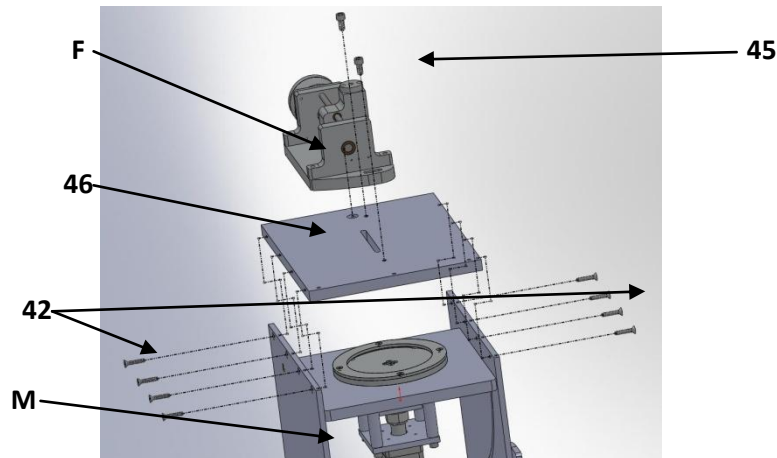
Chassis Assembly [3 of 4] (N) – (F, M, 42, 45, 46)
